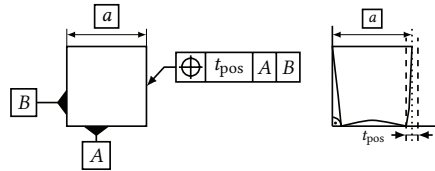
Tolerance Zone for a Position Tolerance with two Datums measured employing a Measurement Fixture
